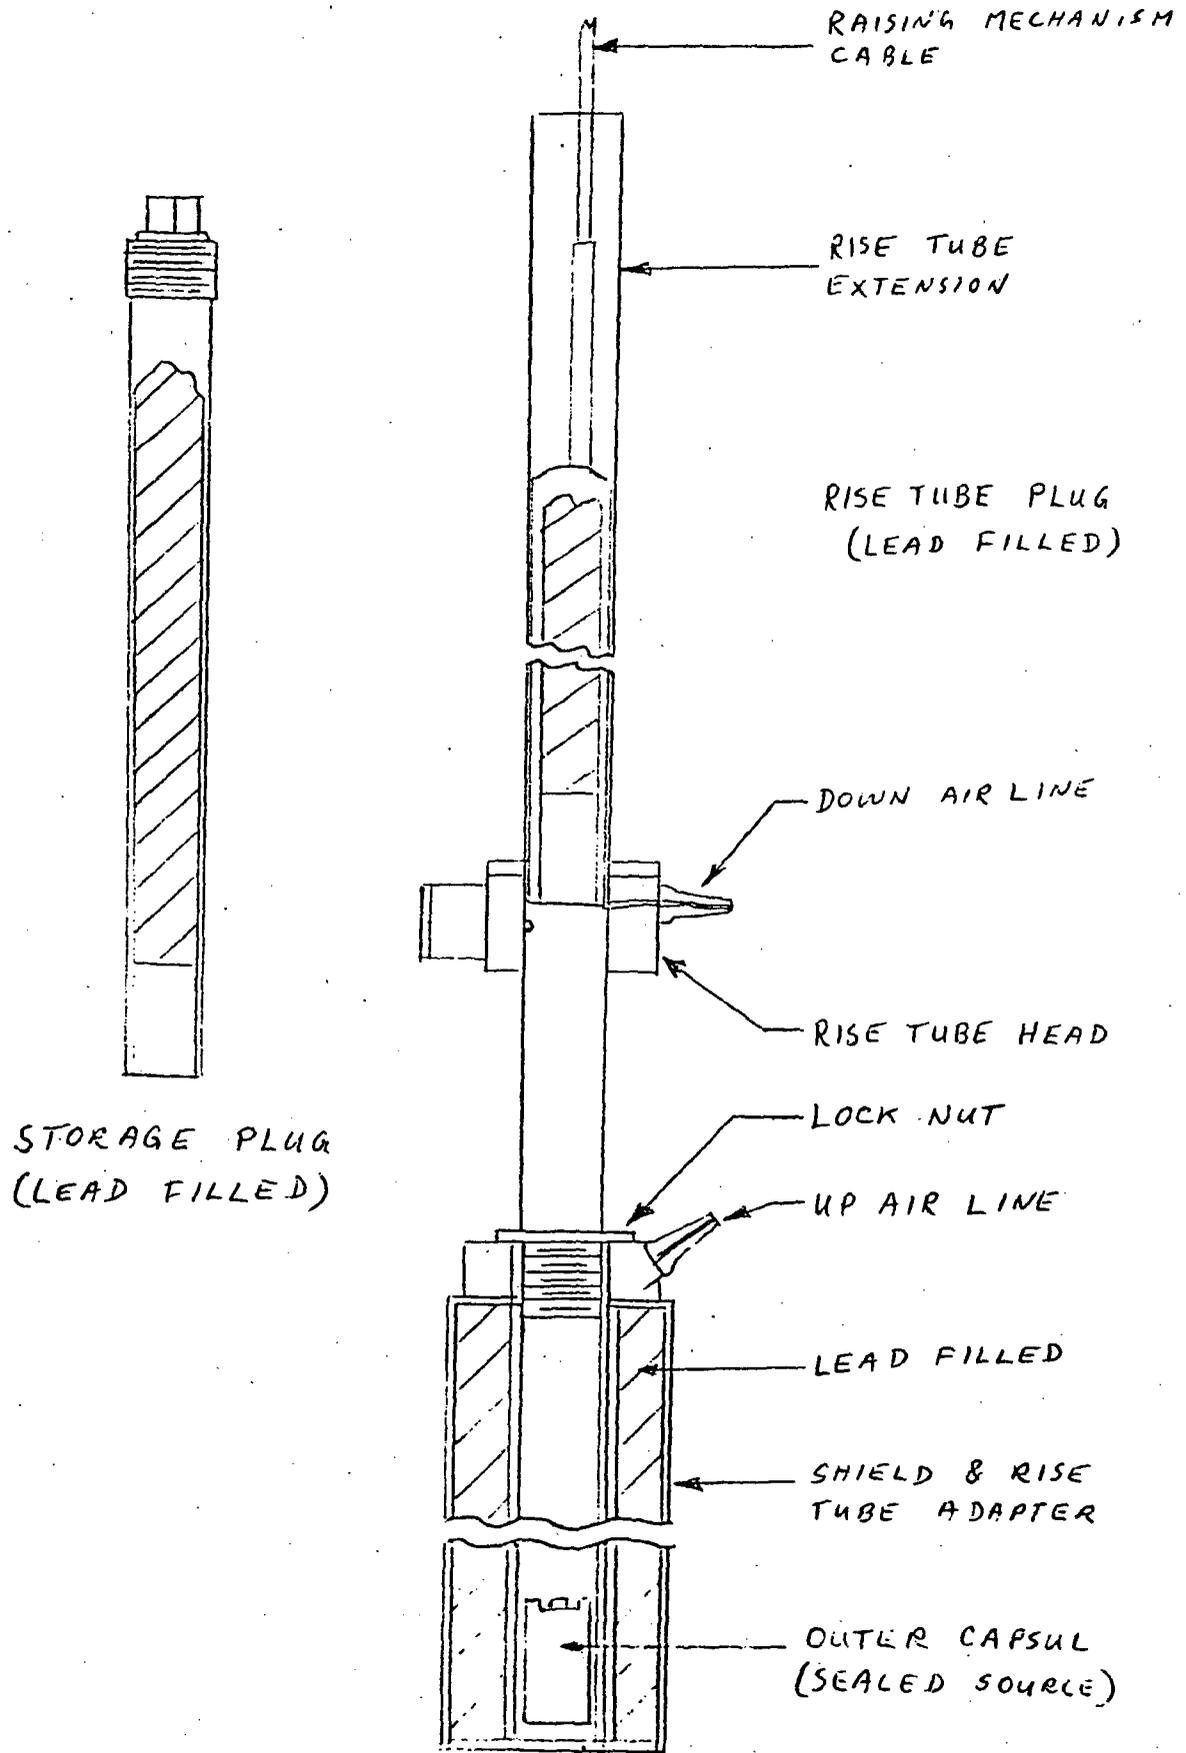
CAPSULE & RISE TUBE ASSEMBLY
